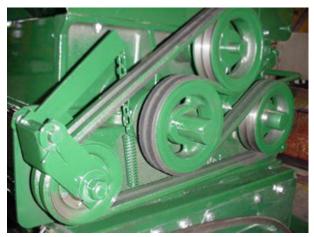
Belt Adjustment (Shields Removed For Clarity).
